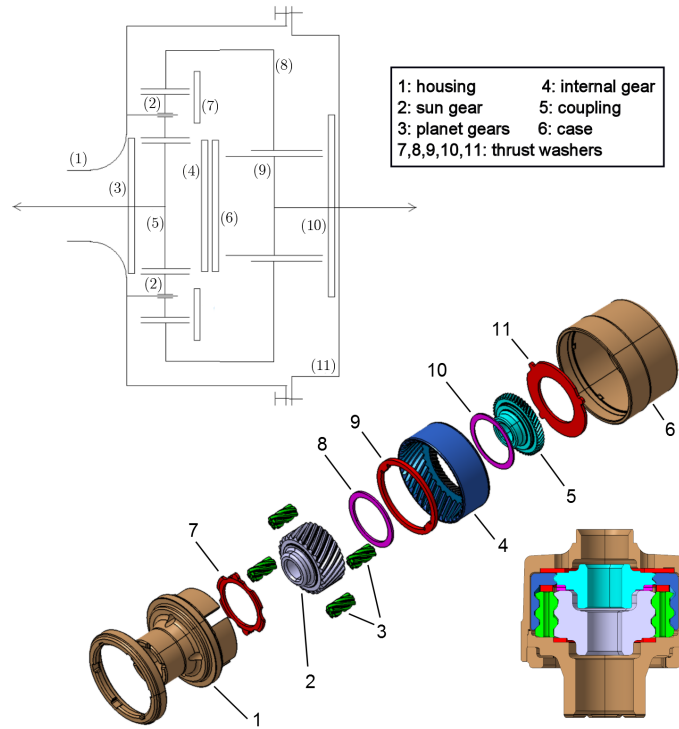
Kinematic diagram, exploded view and cut-away view of type C TORSEN differential.
